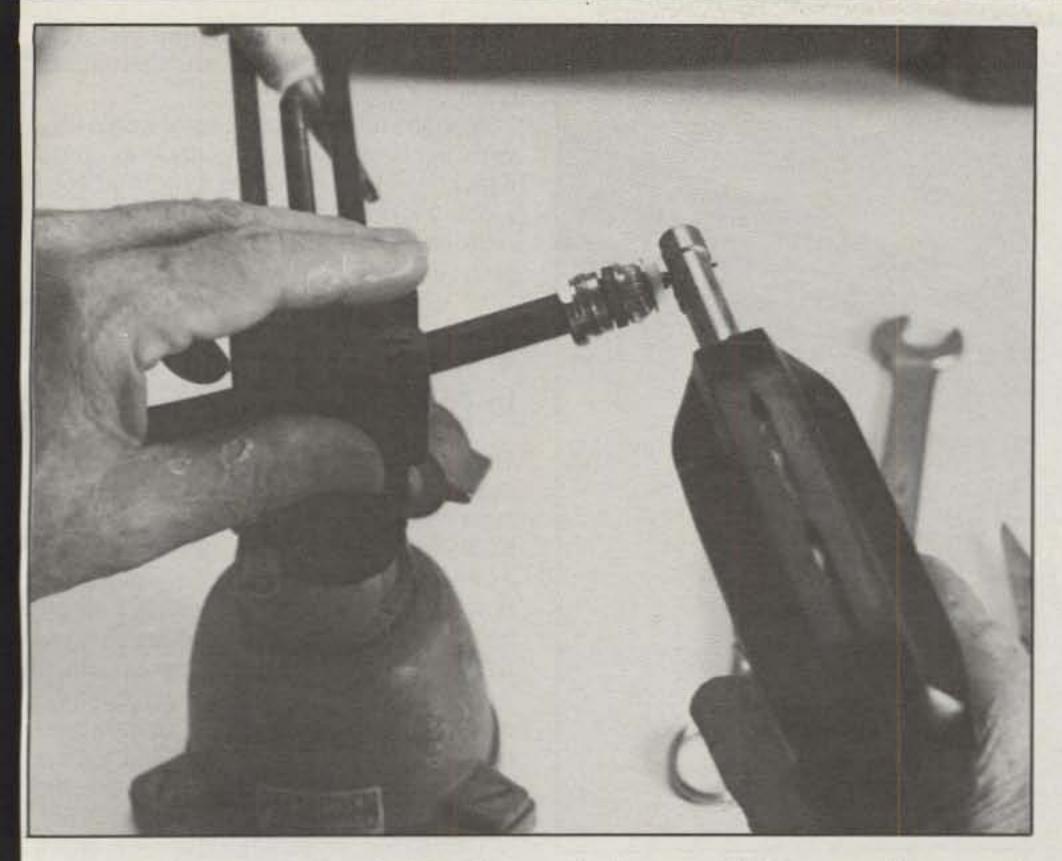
Apply center pin and solder. Use a soldering gun with the copper tip removed.
